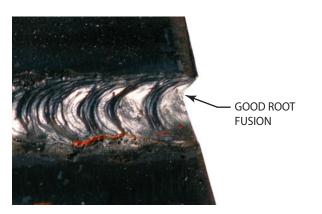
Watch the root of the weld bead to be sure there is complete fusion.
